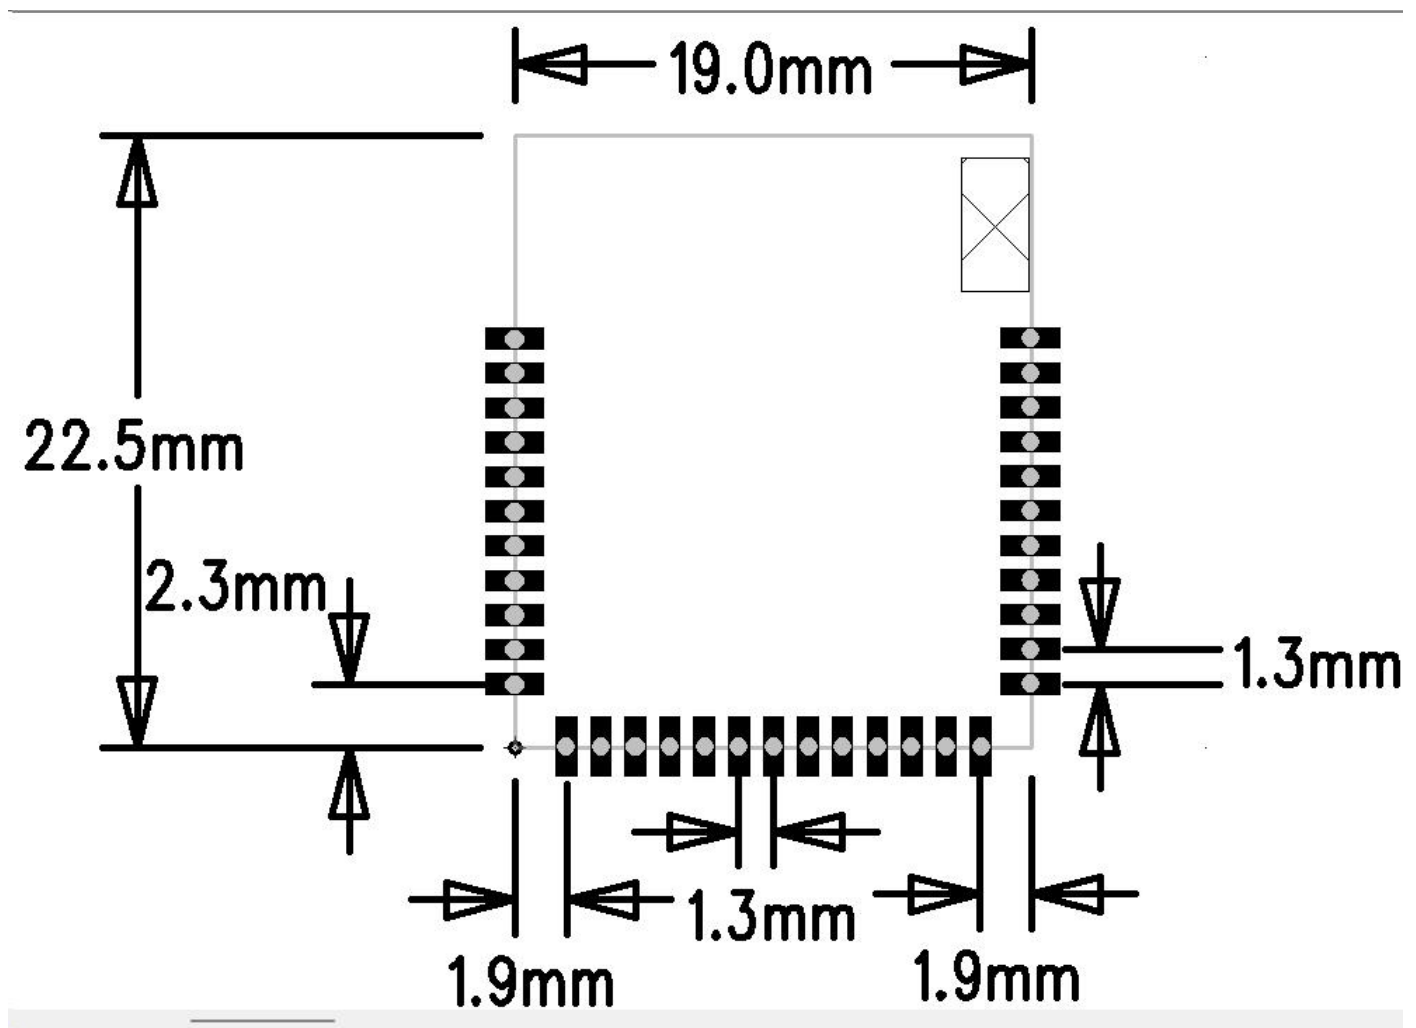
SKU622 PCB Footprint and Dimensions(units: mm)
